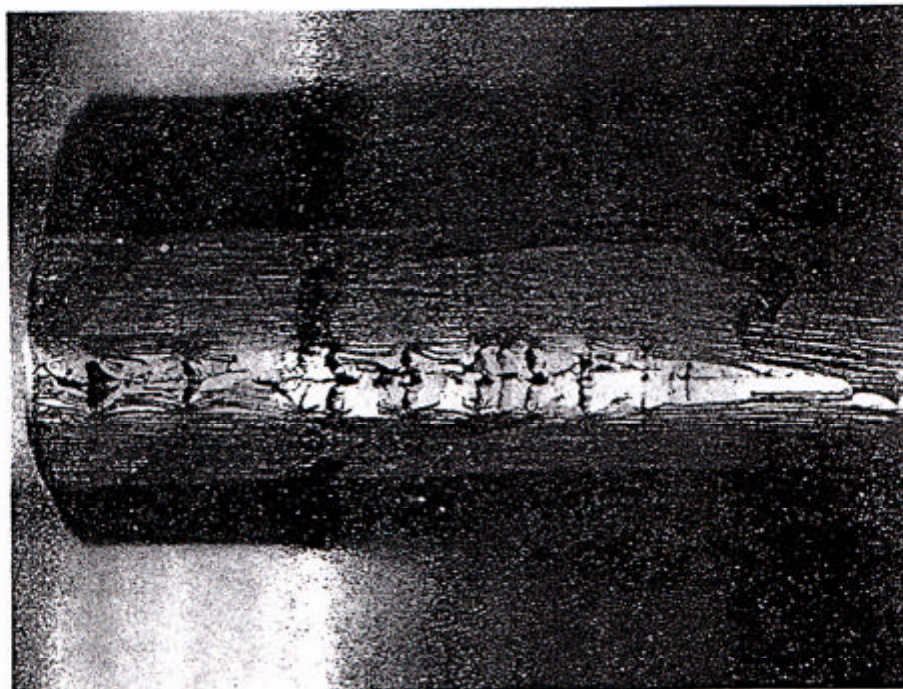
SUB-ARC WELDED - 4.55 MM
